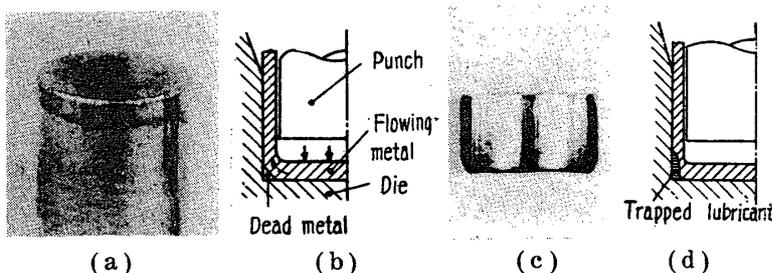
Photographs and Discriptive Figures for Failures at Bottom Edge of Extruded Shell.
